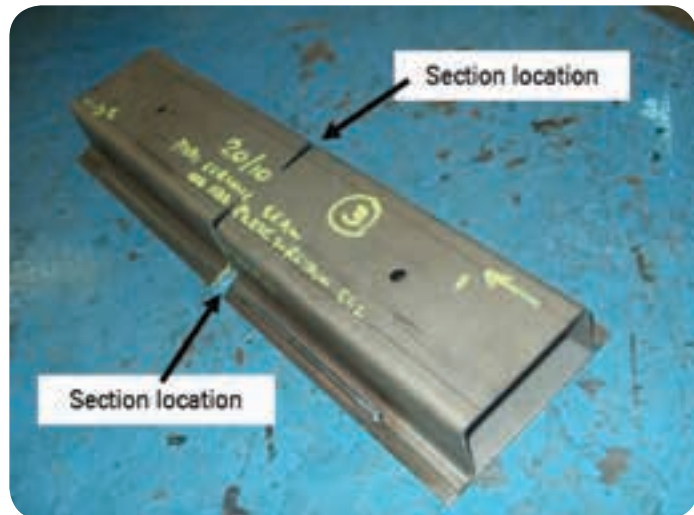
The top hat with its overlap weld joint configuration (welded both sides of the top hat) produced using robotic same-sided LSND welding. The section location taken for the weld macro study are also shown.
